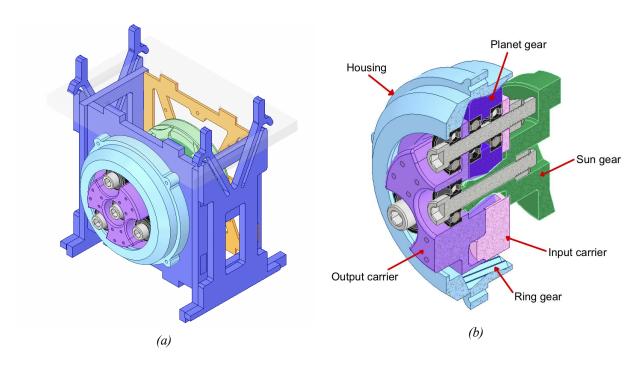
3D printed gearbox design for FastAnt. (a) Full assembly containing the gearbox, T-motor, and mounting assembly: metal plate for heat dissipation (orange), and front and side plates that attach to the FastAnt chassis (dark blue). (b) Labeled section view showing the housing (light teal), sun (green) and planet gears (dark purple), output carrier (light purple), input carrier (pink), bolts, and bearings.
